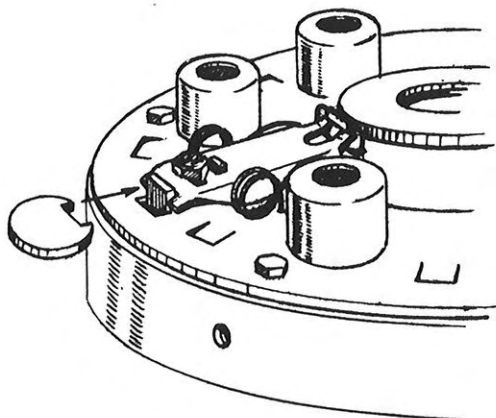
Location of the spacers, tool 93-122, during removal or installation of the spring assembly
